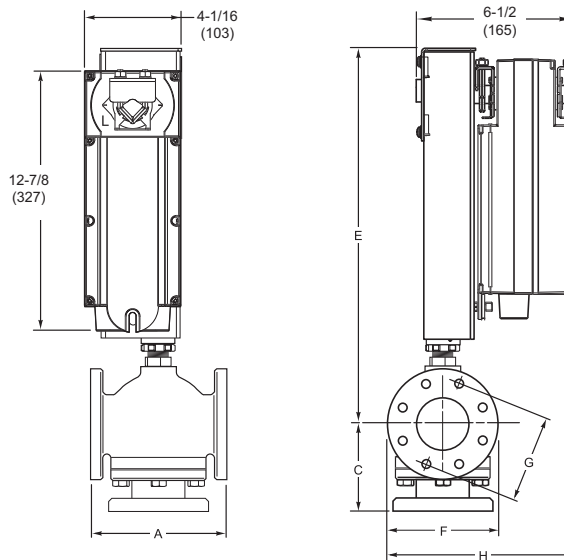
Mx40-717x with Flanged 3-Way Globe Valves
